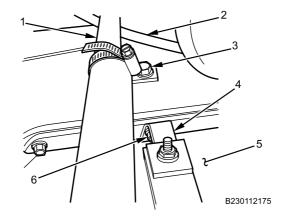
Draft Tube and Transmission Oil Cooler Lines Bracket.
